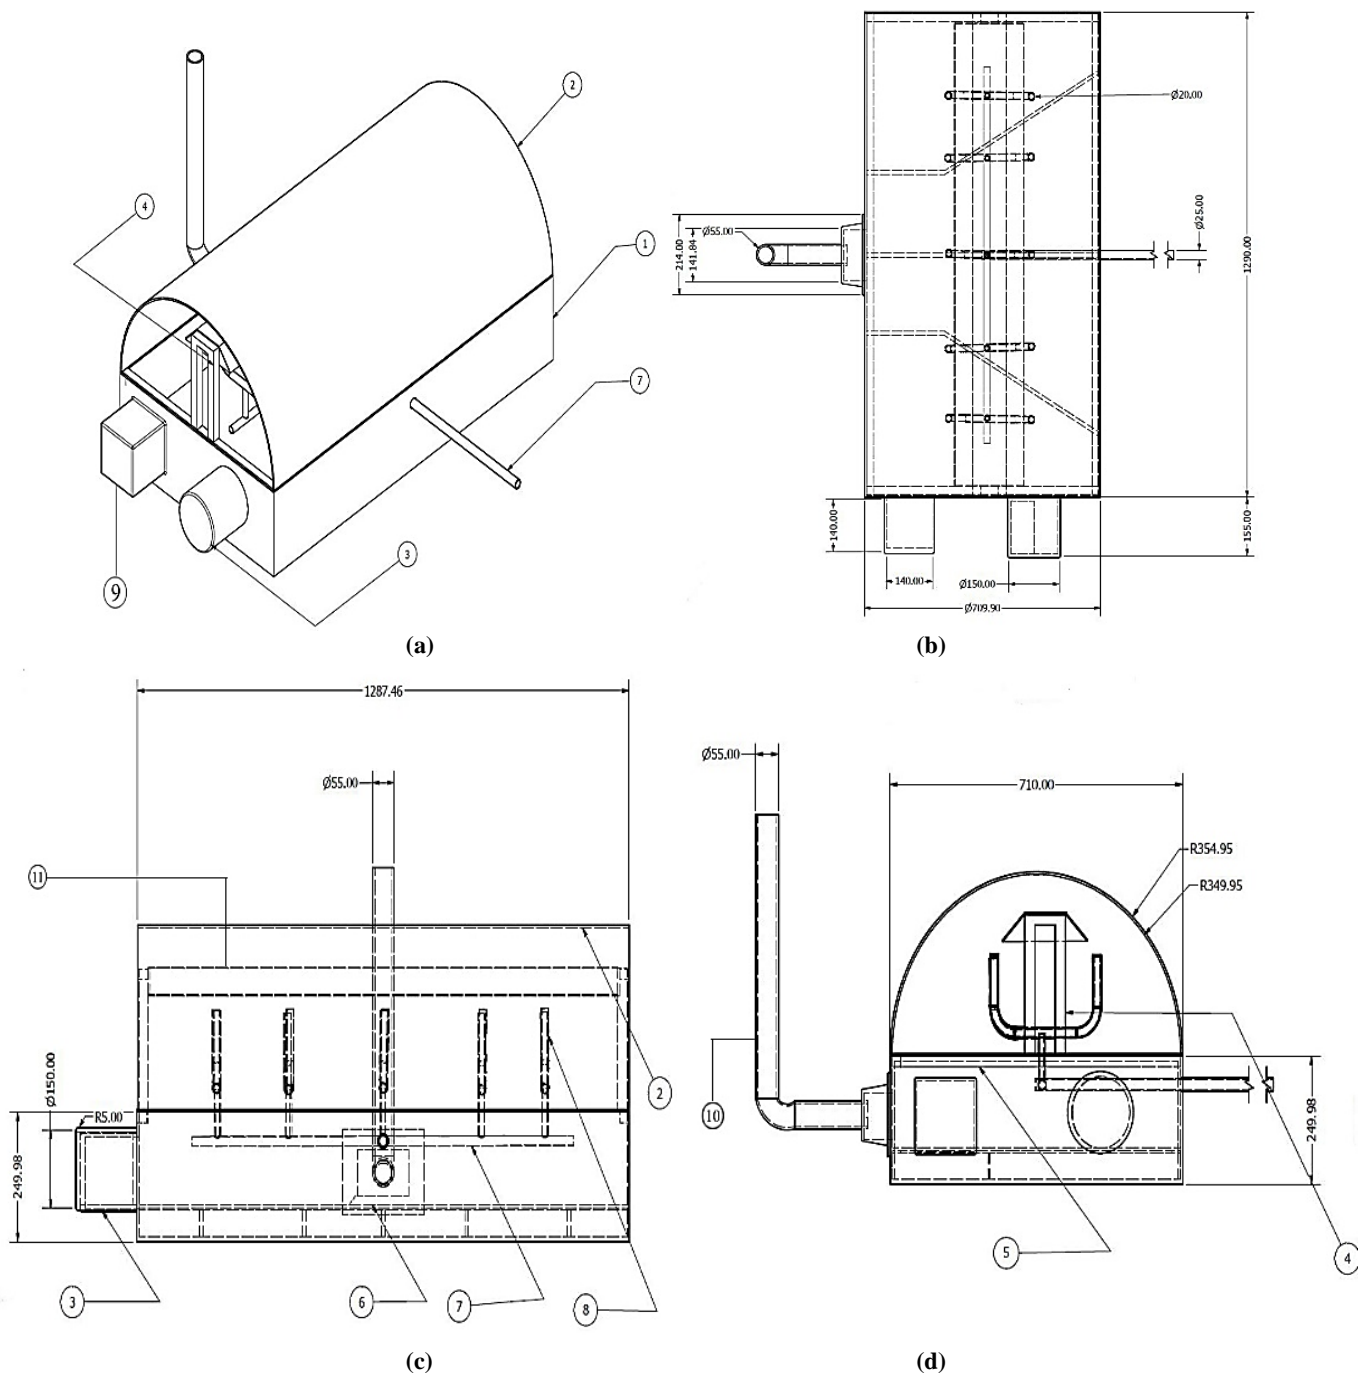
Engineering Drawing of Newly Developed Hybrid Solar Dryer. (a) Isometric View, (b) Top-View, (c) Left Side View, (d) Front View.
